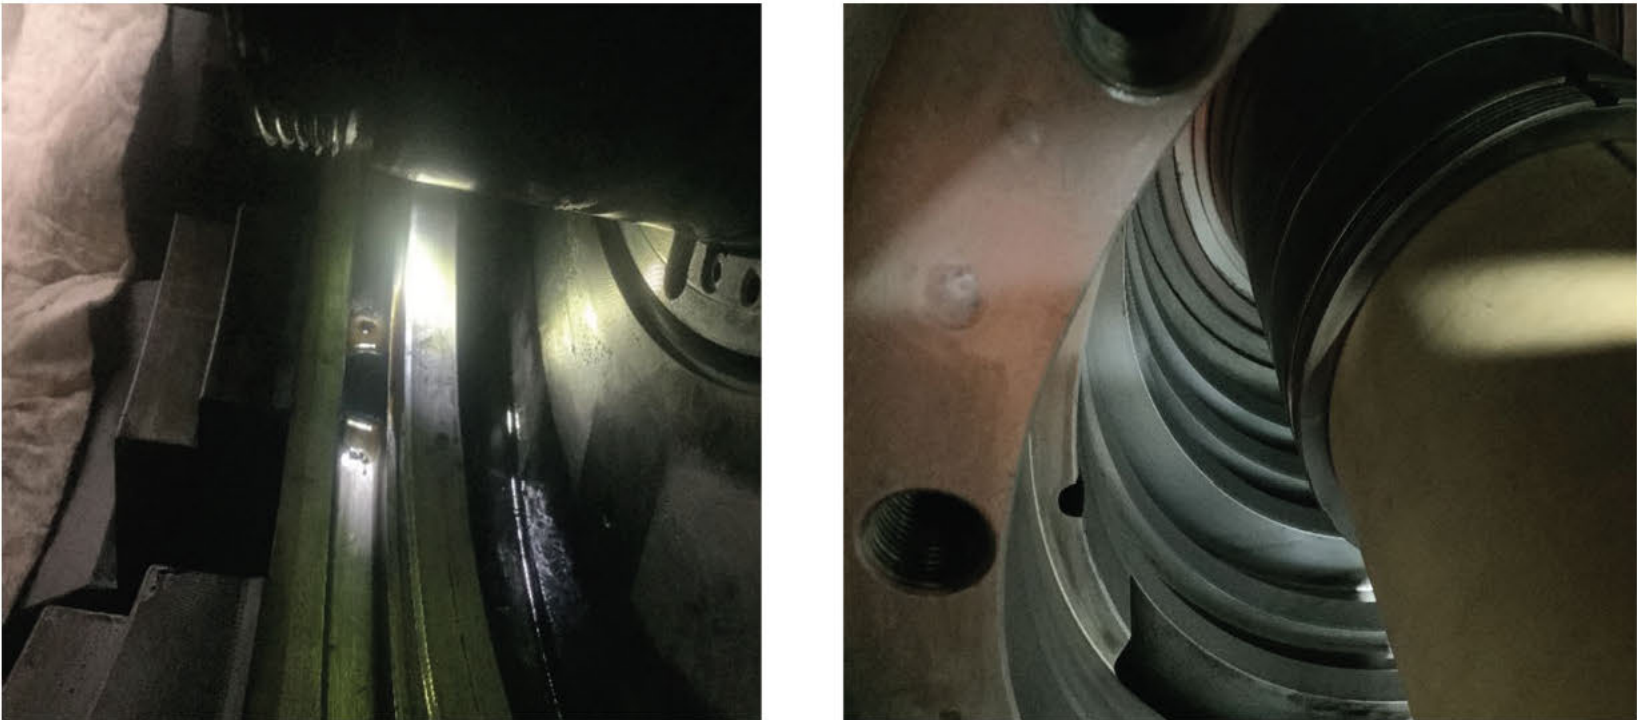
██████████ Unit 2A - Oil found in barrier, secondary and primary seal cavities. Before and after cleaning and inspecting.
